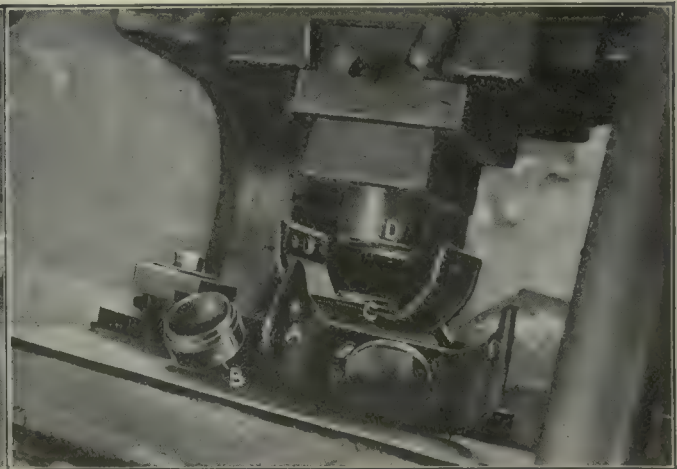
PRESSING THE BEARING CAGE INTO THE END PLATE
